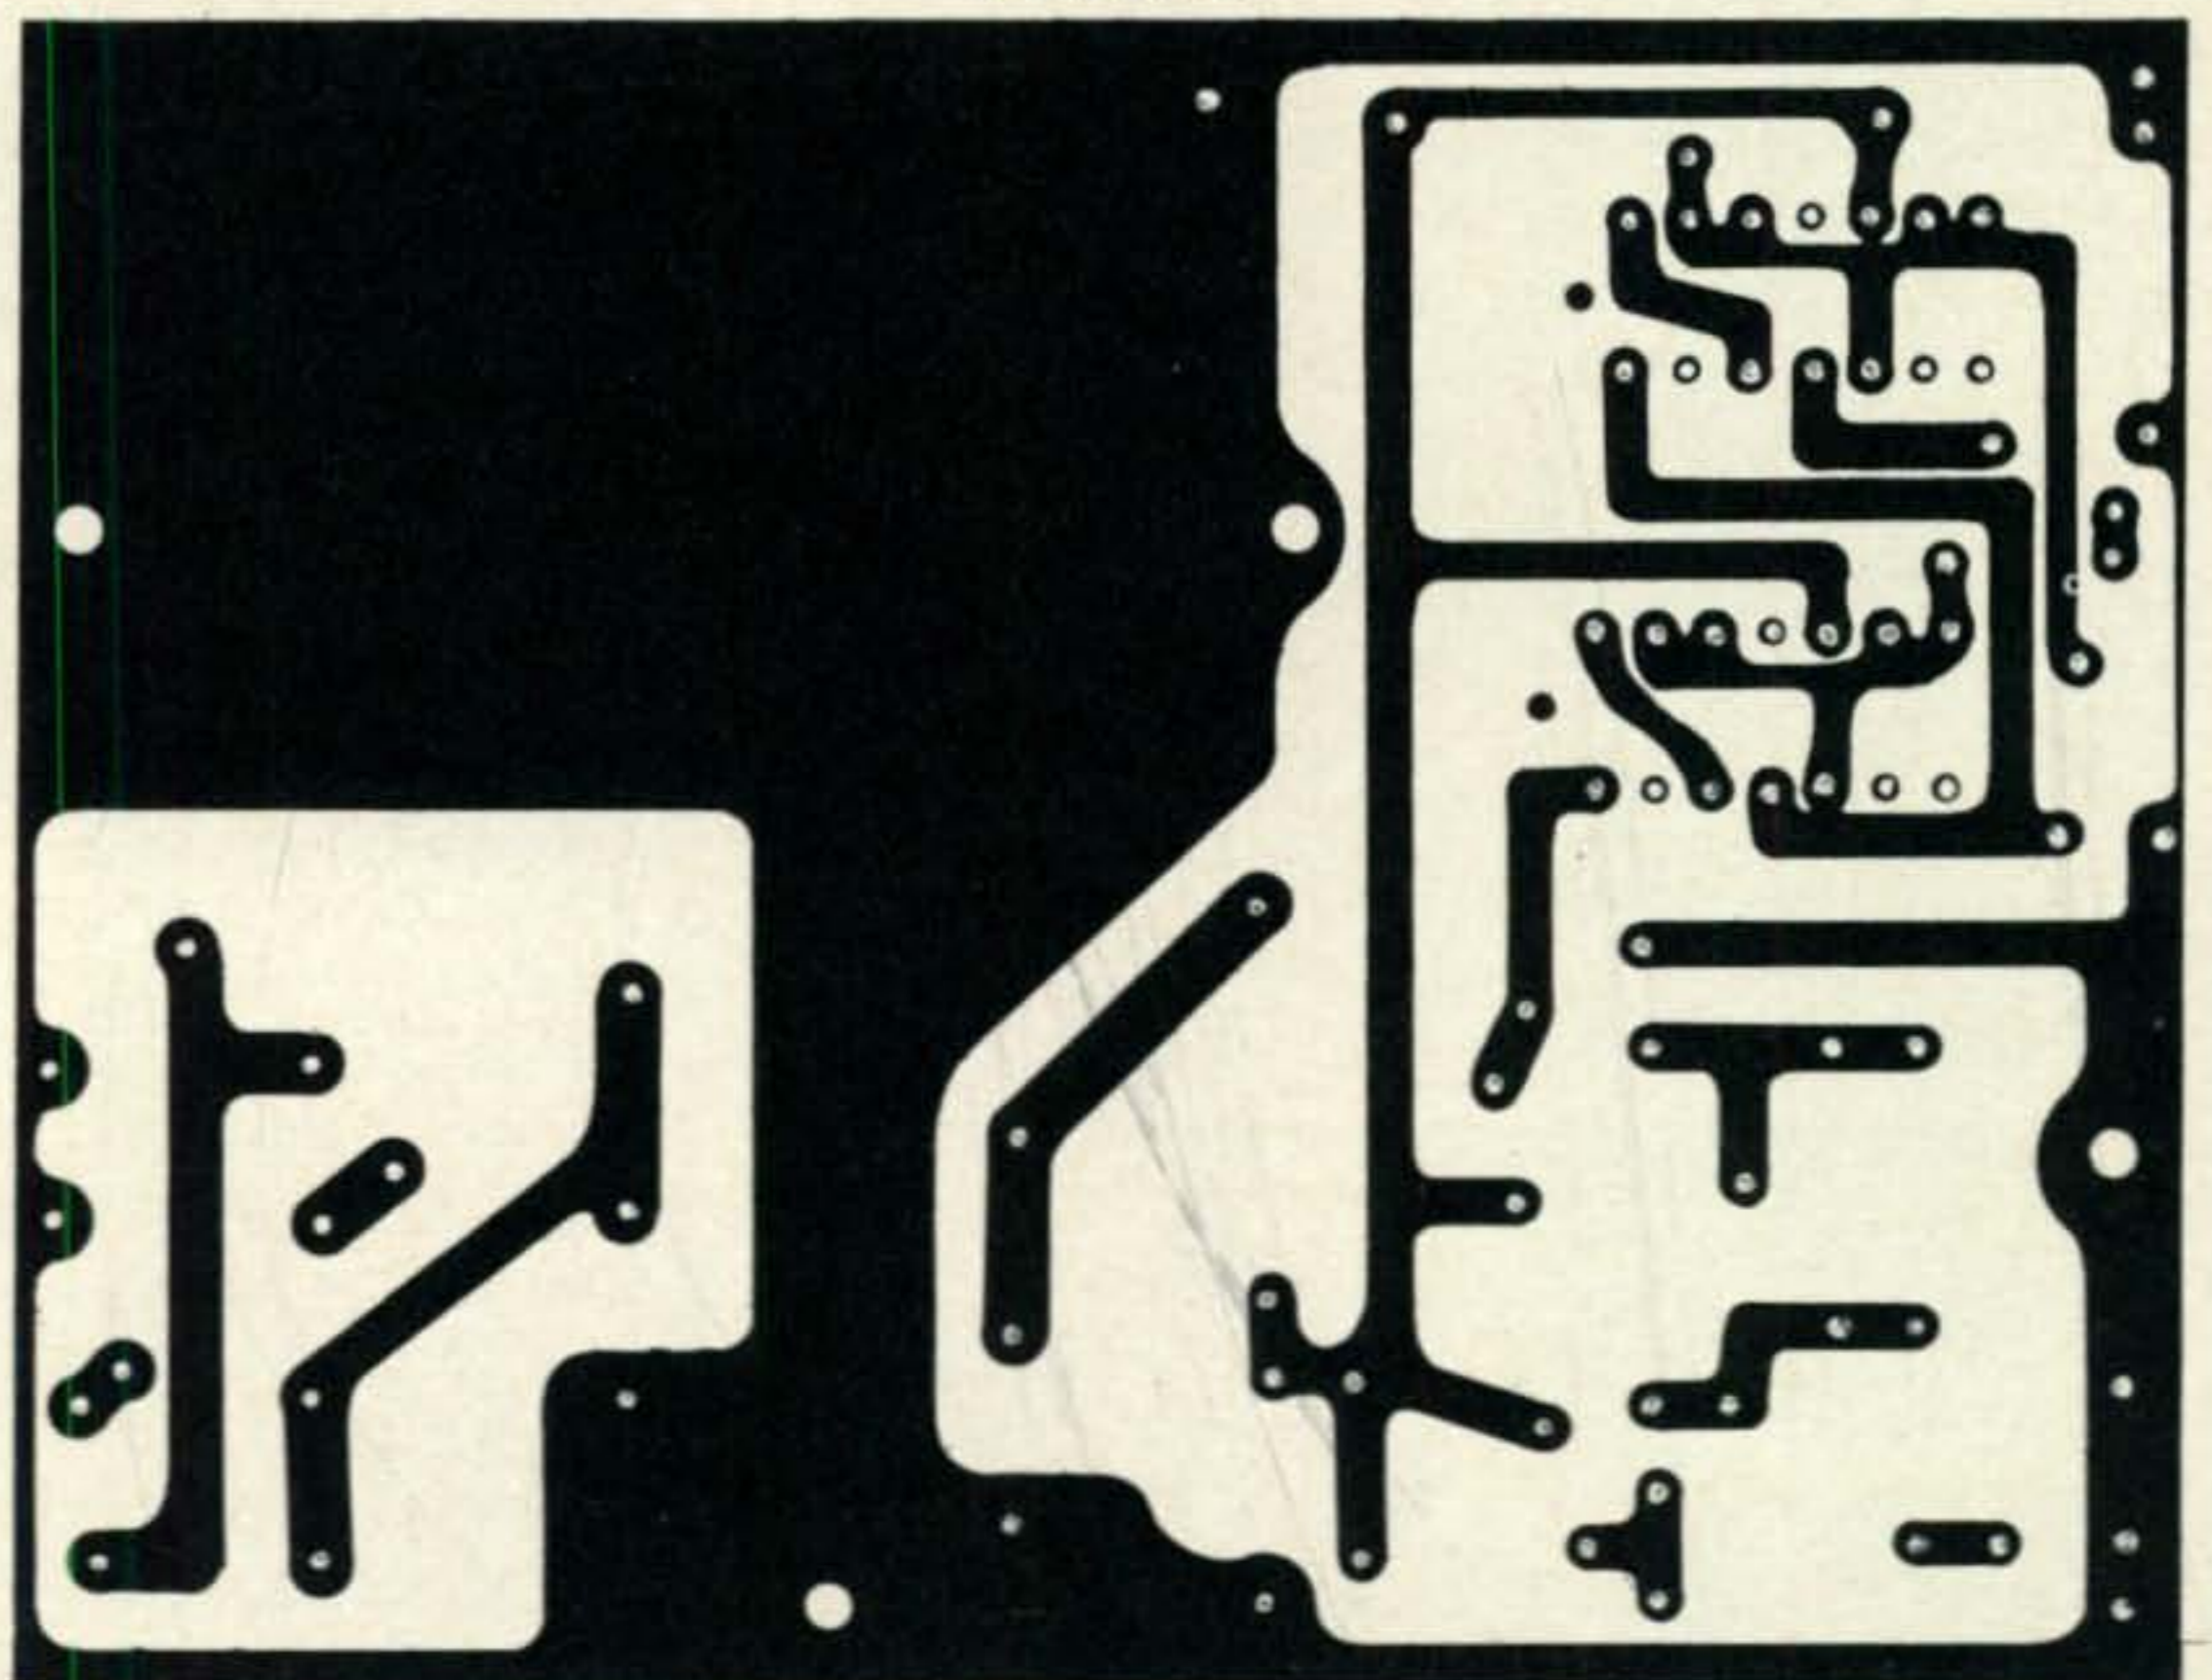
Same-size foil layout and parts placement for the W3CRG frequency scaler.
